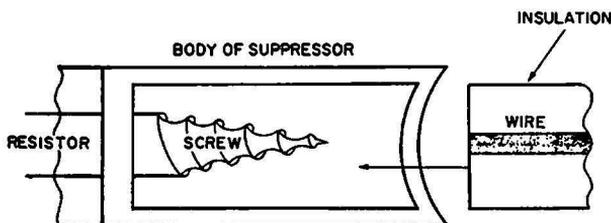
Detail of one end of a cable-type resistive suppressor.
